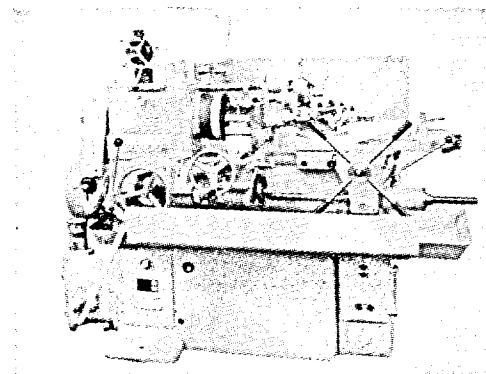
Herbert No. 2D Capstan Lathe for bar work up to 1 1/2" diameter and chuck work up to 9" swing.
